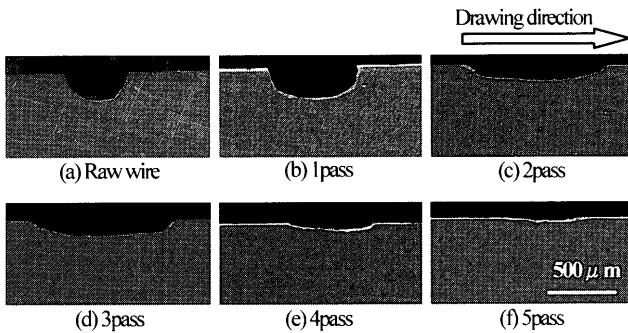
Shape changes of crack in cross-section during multi-pass drawing of wire.
